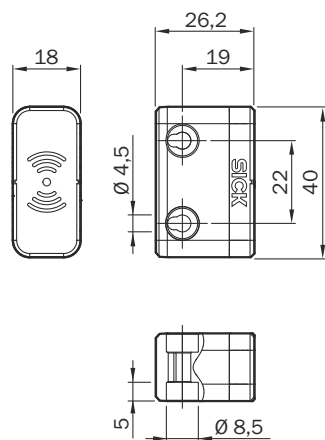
Dimensional drawing of "Standard" STR1 actuator
